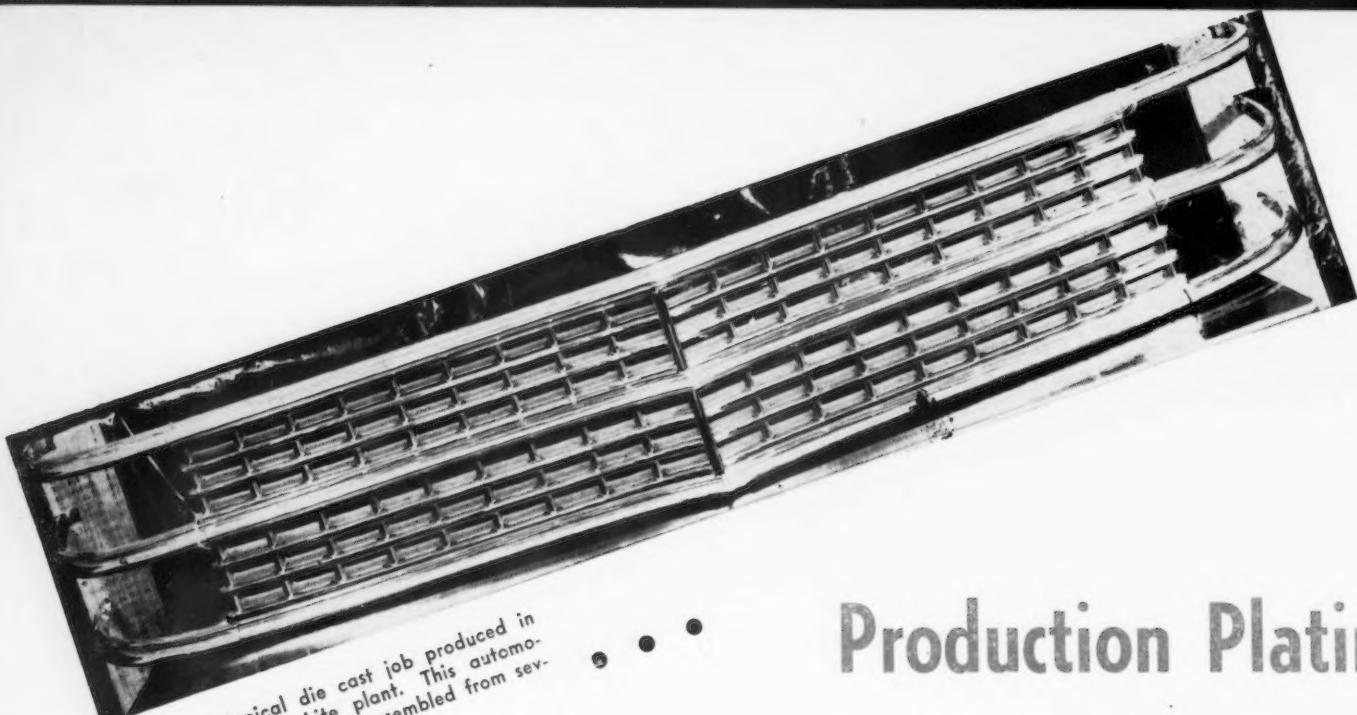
A typical die cast job produced in the Electric Auto-Lite plant. This automobile grille, finish plated, is assembled from several zinc die castings.
